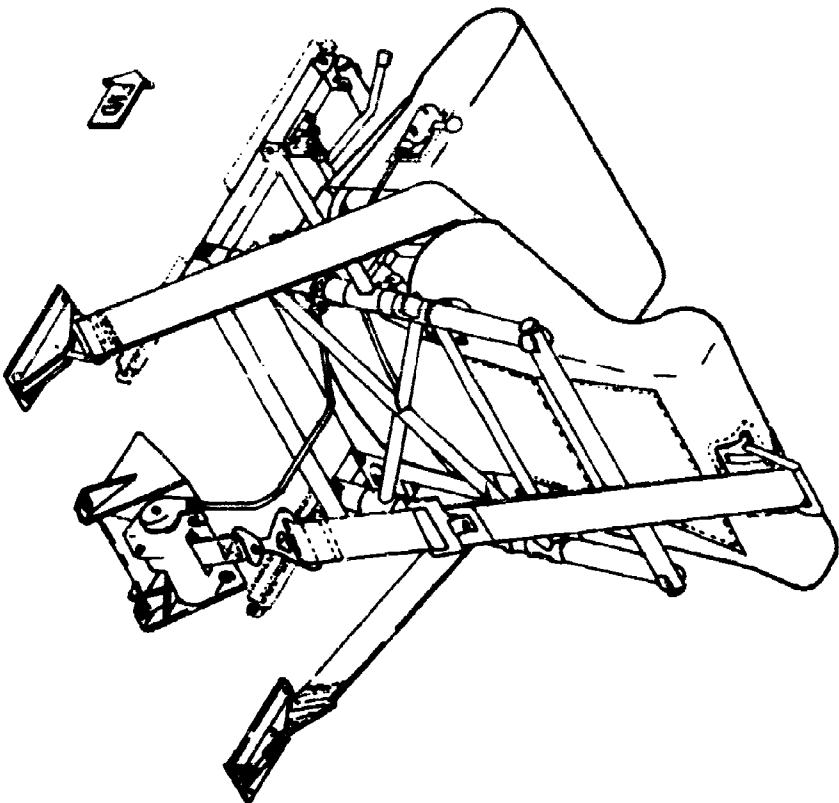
UH-1D Pilot and Copilot Seat Assembly.
